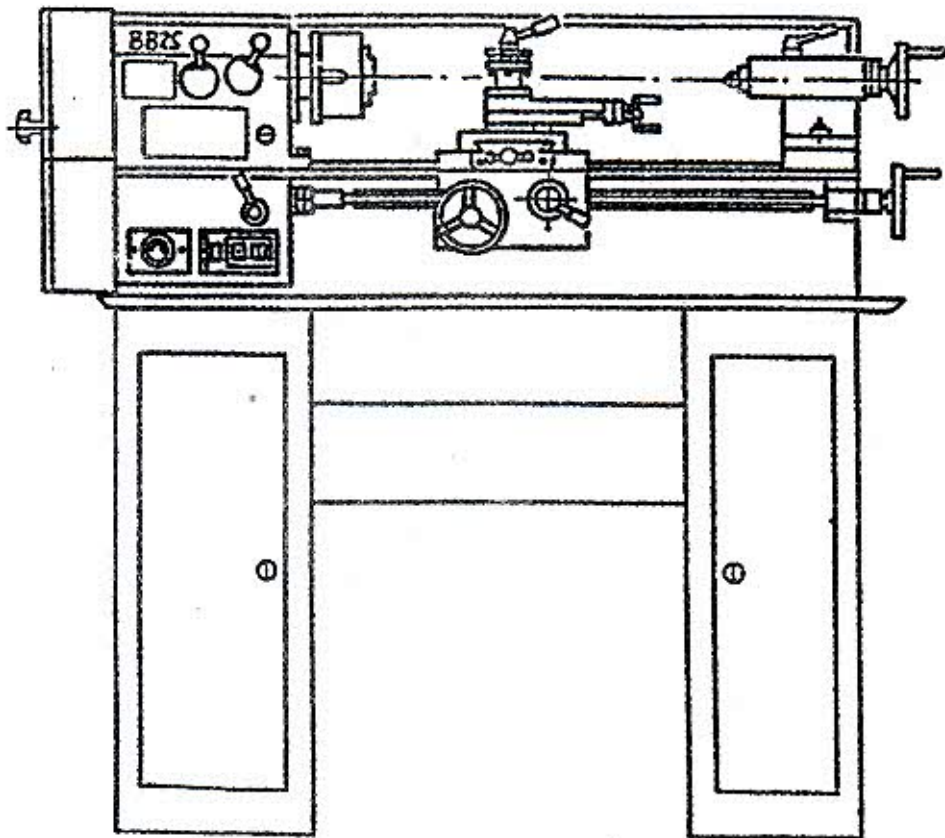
2 OUTLINE DRAWING OF BV25B - 2 BASE FRAME CUTTING MACHINE
